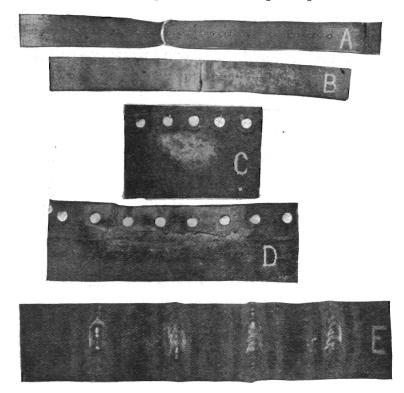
A. Unwelded test piece. B. Welded test piece. C. Repair of wasting in boiler plate. D. Inside of boiler drum showing section cut out by chisel and replaced by welding. E. Short lengths of boiler tube welded together.
